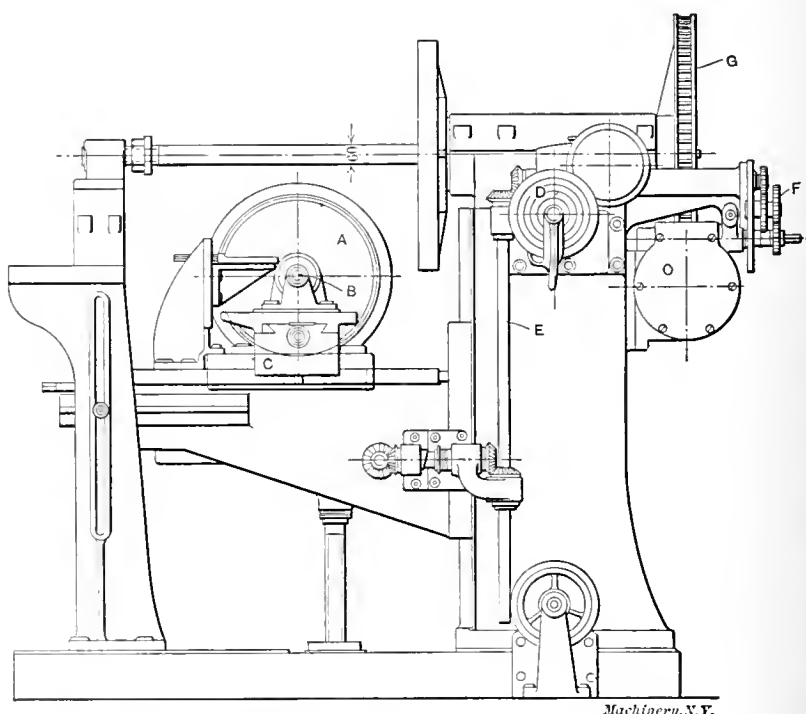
Side View of the Reinecker Universal Gear-cutting Machine, showing the Geared Connections between the Index Worm-wheel and the Feed of the Cutter Slide.
